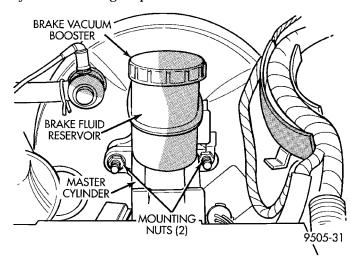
Master Cylinder Mounting To Vacuum Booster
